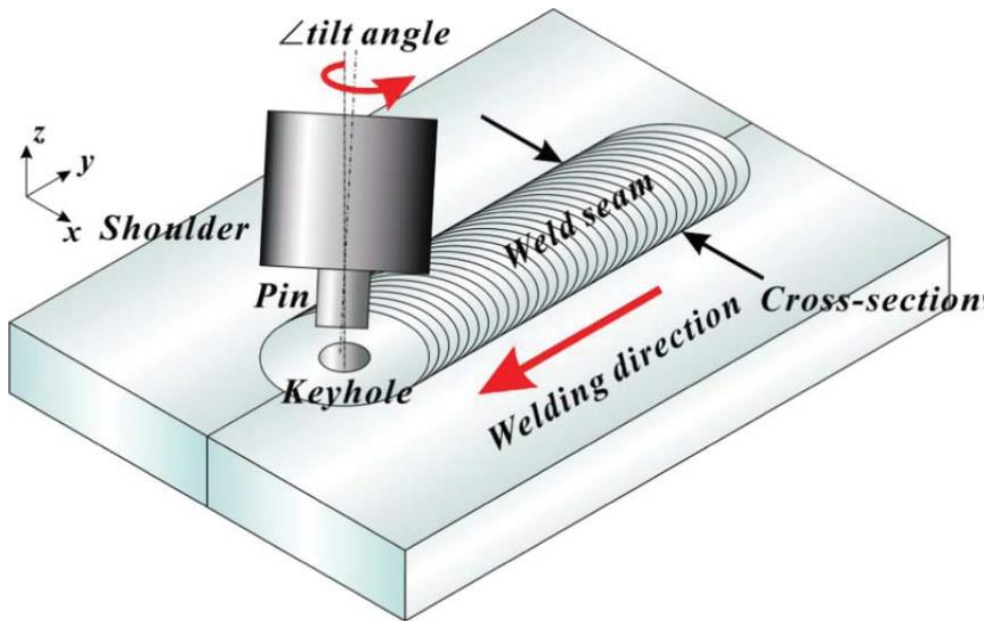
Schematic of Friction Stir Welding (FSW) (Ma, Feng, Chen, & Shen, 2018)
